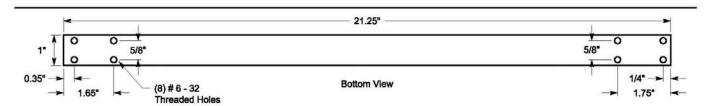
Bottom view of the boom. The top is nearly identical, except that the holes clear #6-32 screws. Use a #36 bit to drill the tapped holes and a #28 bit to drill the holes on top.
